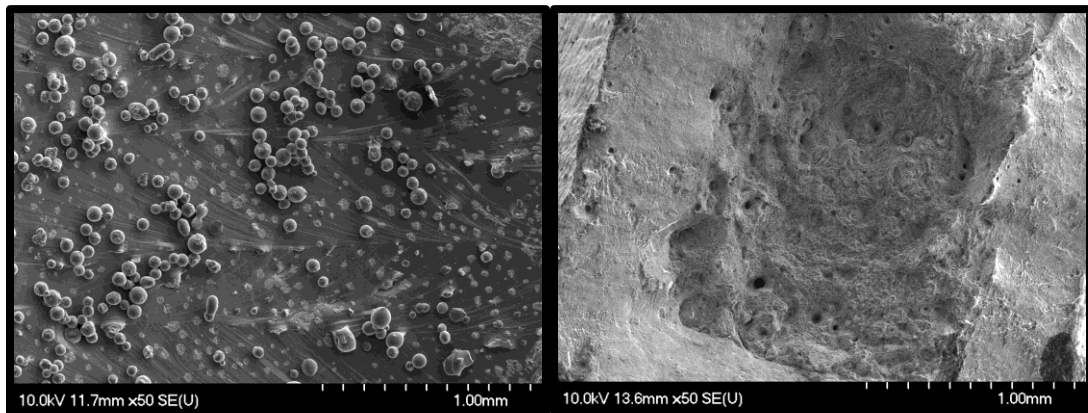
Fracture surfaces of (a) Vendor A and (b) Vendor C z-direction built samples
